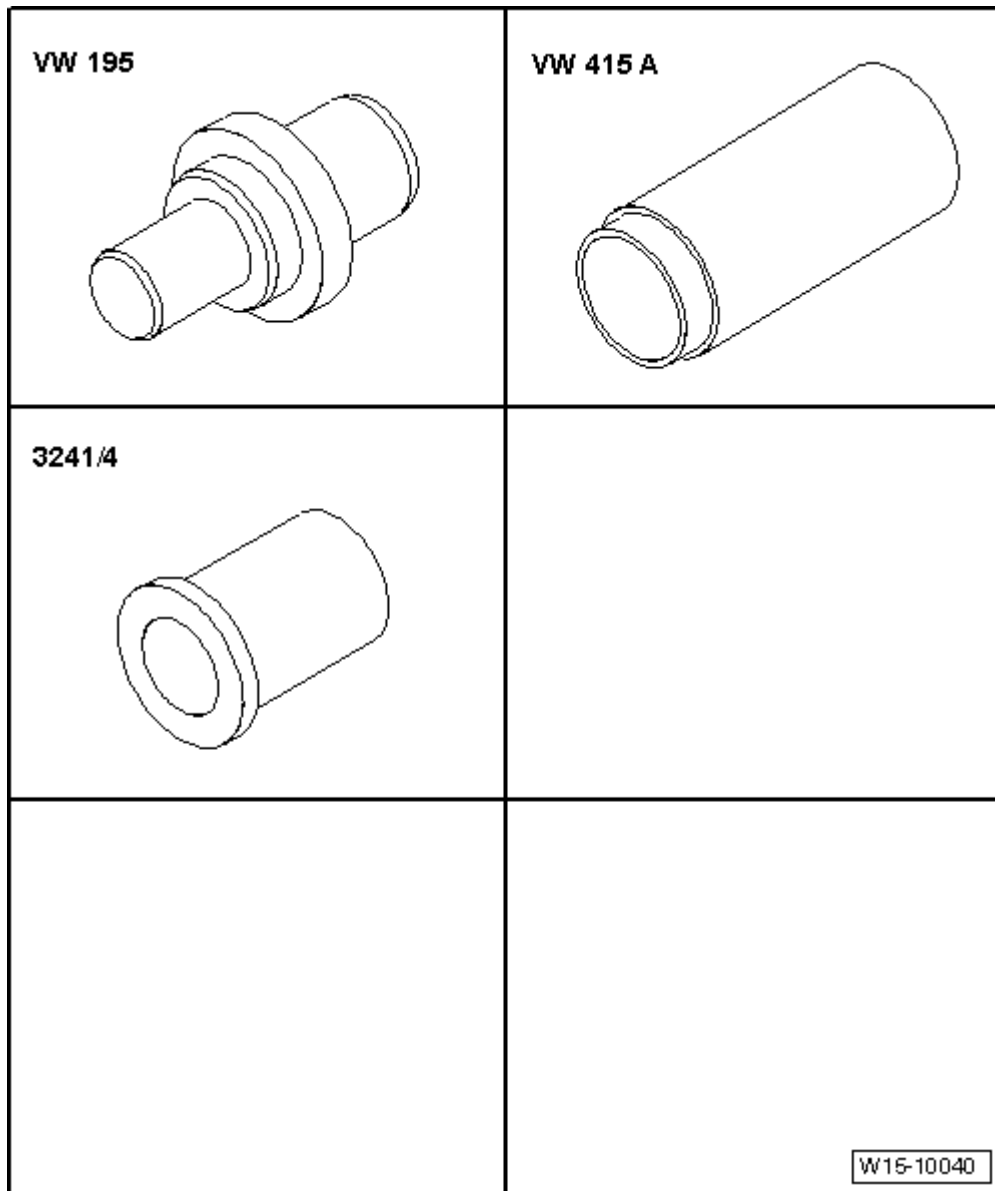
Identifying Special Tools -- Chain Case Cover Sealing Ring, Replacing
